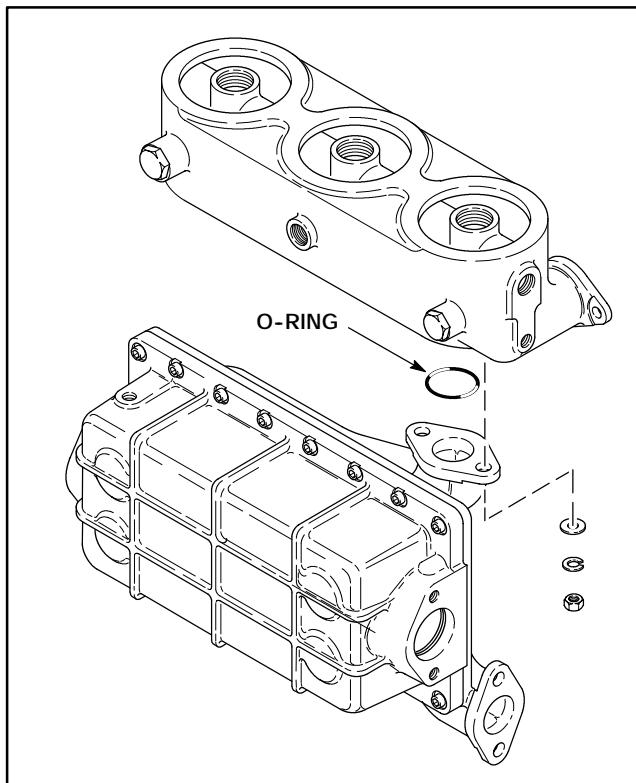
Oil Filter To Oil Cooler Installation
